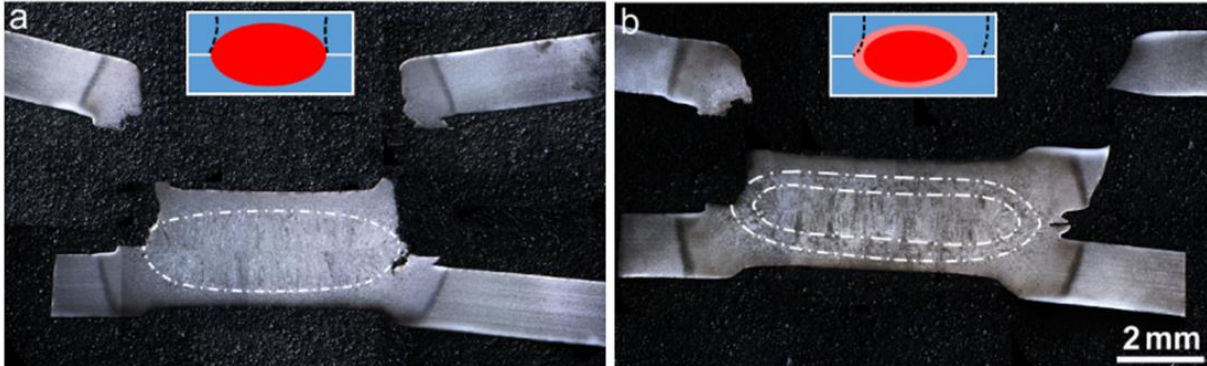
Cross-section of CTS samples of (a) single pulse and (b) double pulse weld [74].
